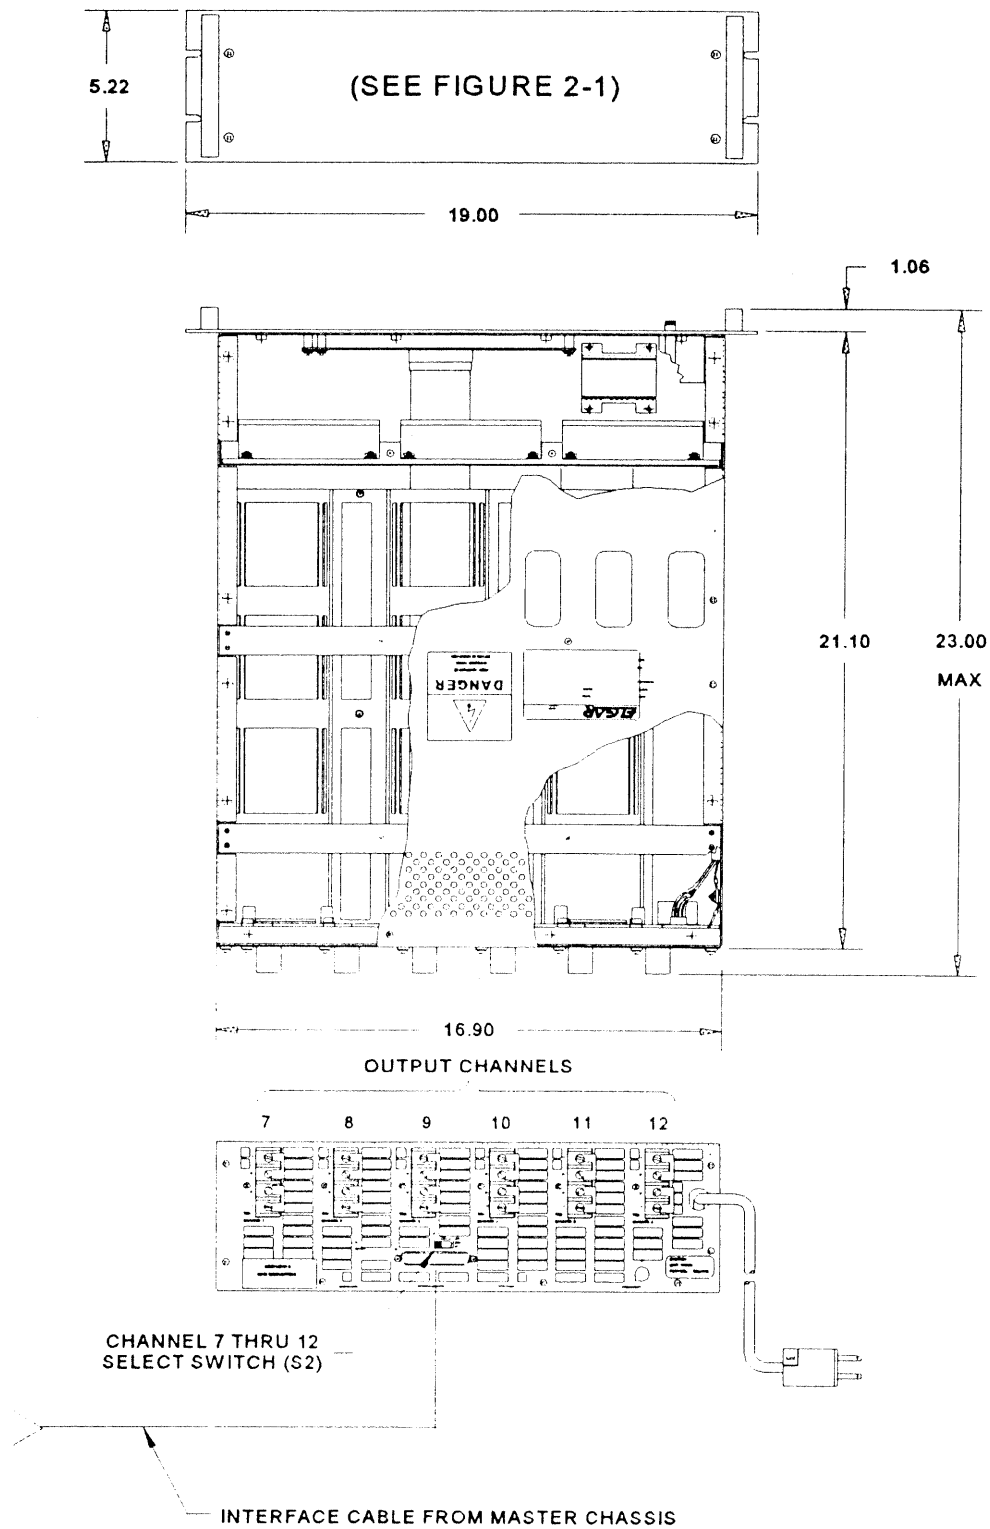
Model AT8000B SLAVE Chassis Configuration Outline Drawing
